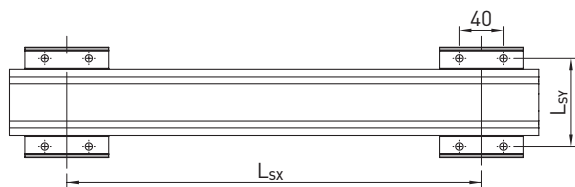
Securing with clamping profiles – HM040, HM060, HM080
